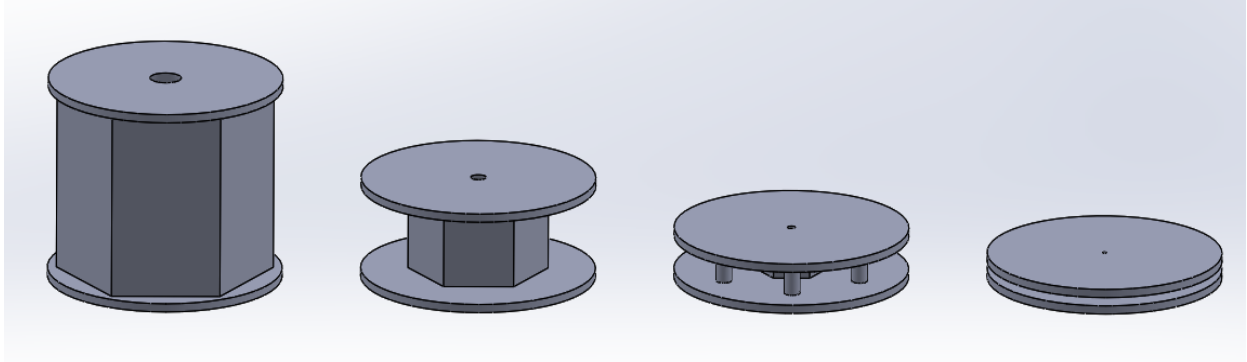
SISO - Downsizing Prototypes - Isometric CAD View
